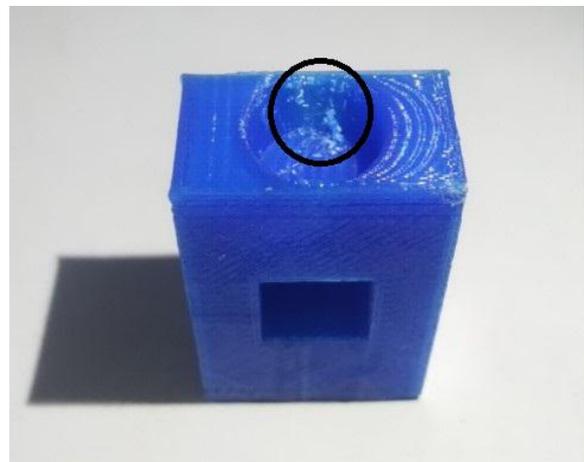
Sample of Magnet Plate Printed Using FDM
